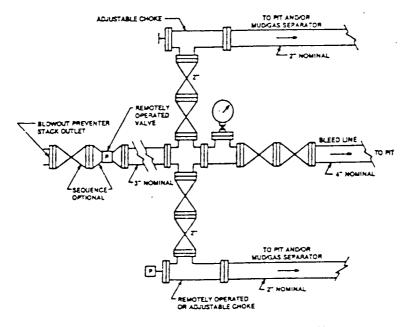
Typical choke manifold assembly for 5M rated working pressure service — surface installation.
